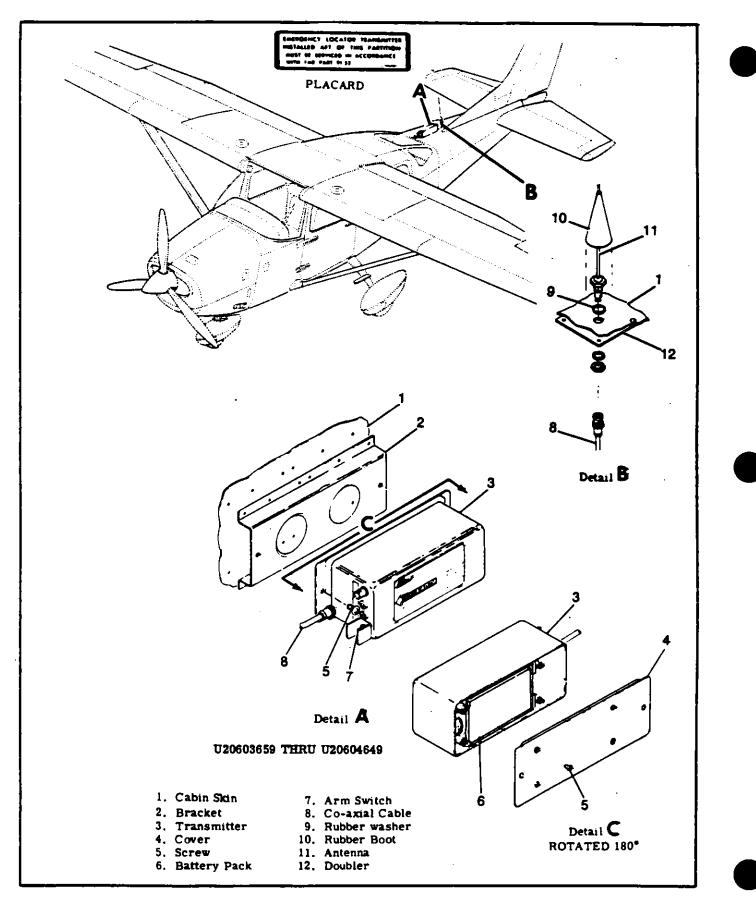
Emergency Locator Transmitter. (Sheet 1 of 3)
